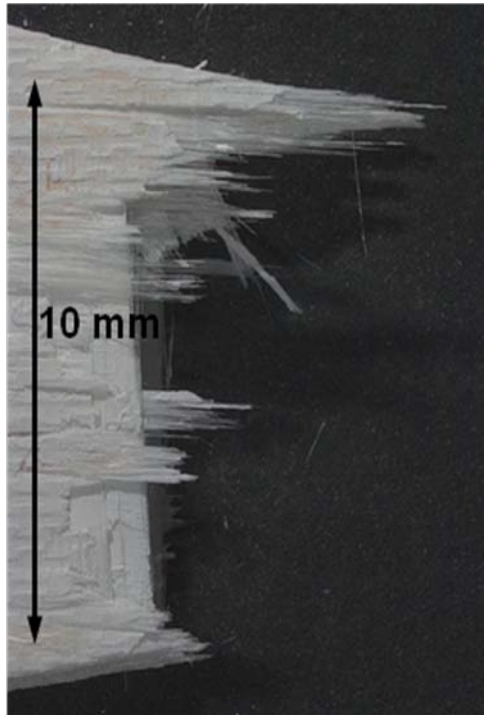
Fracture surface of the N720/AM specimen tested in tension to failure at 900°C in laboratory air.
